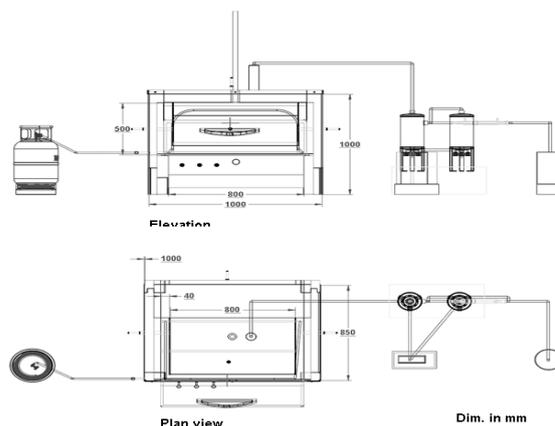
Dimensions and engineering drawing of developed pyrolyser kiln.
